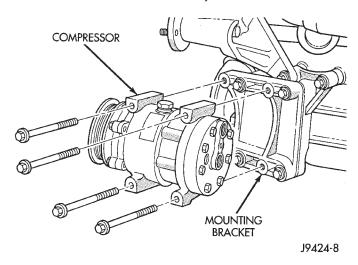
Compressor and Mounting Bracket (RH Drive Vehicles)
